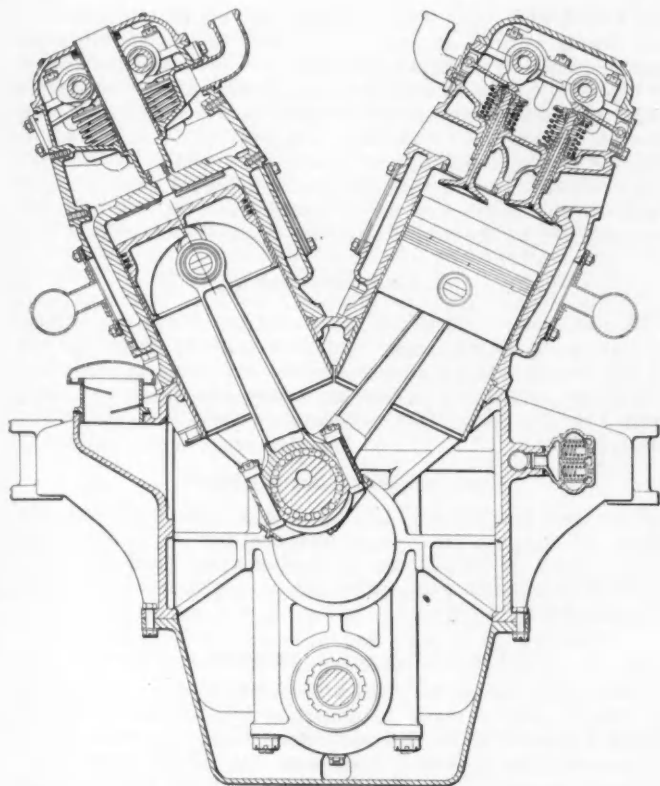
CROSS-SECTION THROUGH ONE OF THE ENGINES
